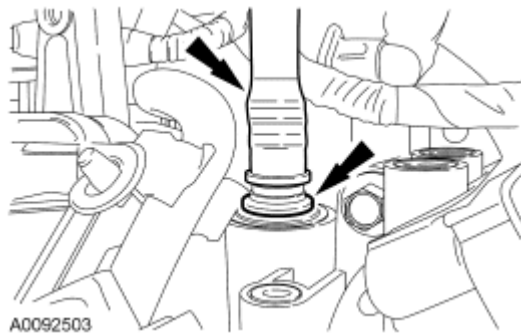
Locating Power Brake Booster Vacuum Tube And Quick Release Locking Ring
